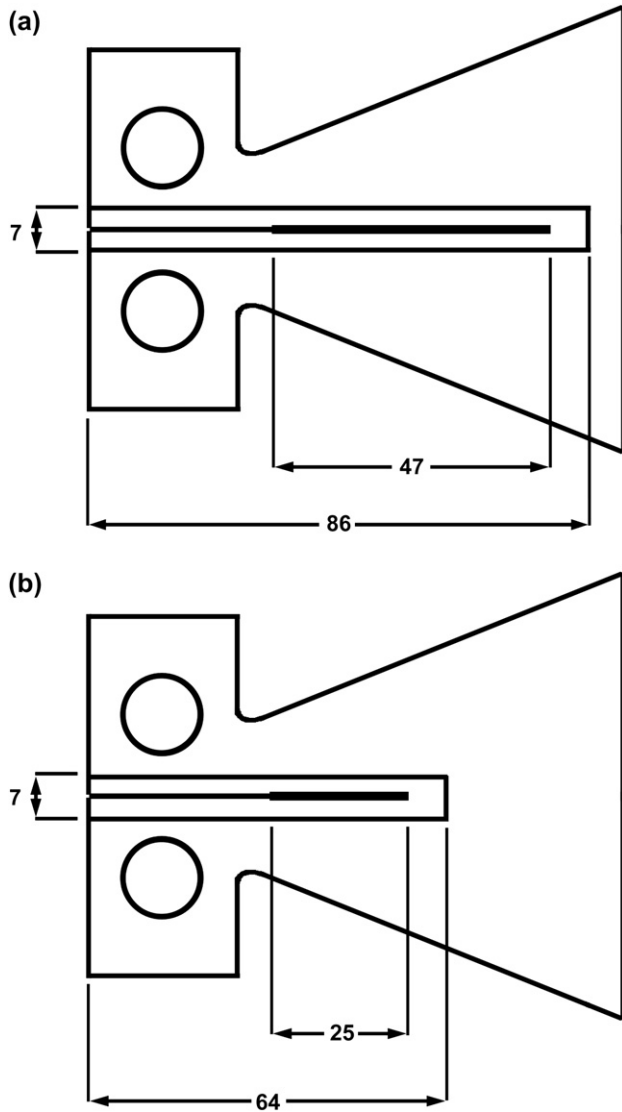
Dimensions of localized TDCB fracture specimens with (a) a 47 mm groove and (b) a 25 mm groove.
